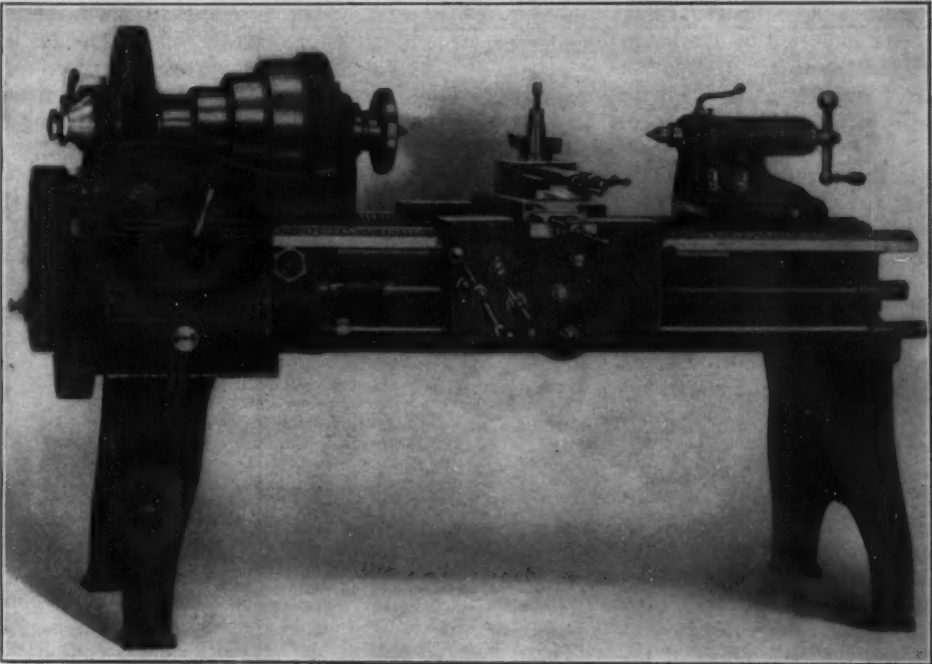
A 16-In. Engine Lathe with Quick-Change Feed Gear, Built by the F. E. Reed Company, Worcester, Mass.
